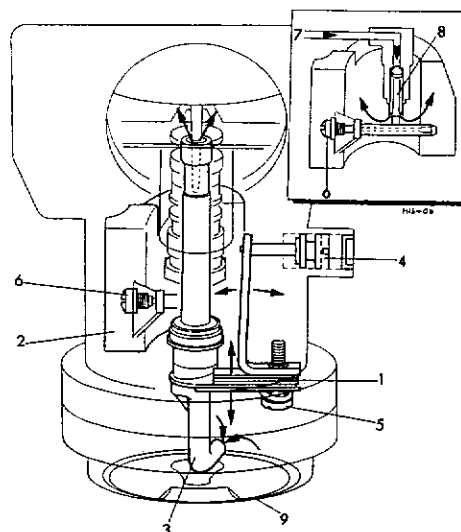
HIF carburettor float chamber layout (Sec 2)
